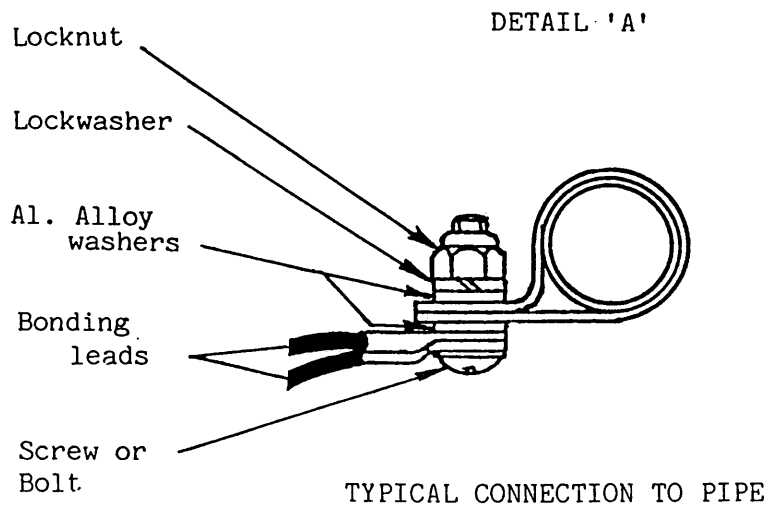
Installation of Bonding Leads - Details (Sheet 2)
